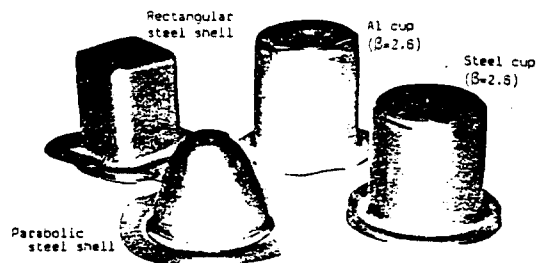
Samples produced by inverted-type counter-pressure drawing.
